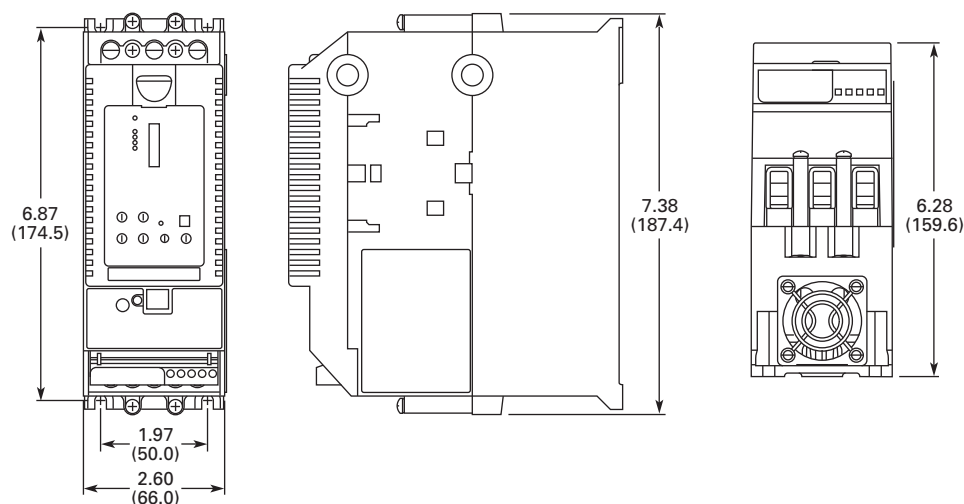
N-Frame (65 mm) S801 Approximate Dimensions in Inches (mm)
